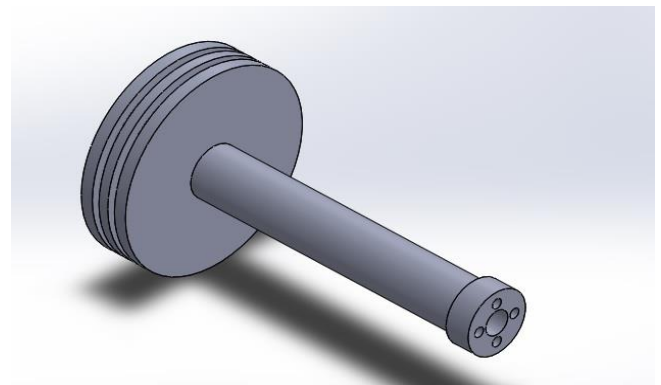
solid works 3D model of Piston and Connecting rod assembly
